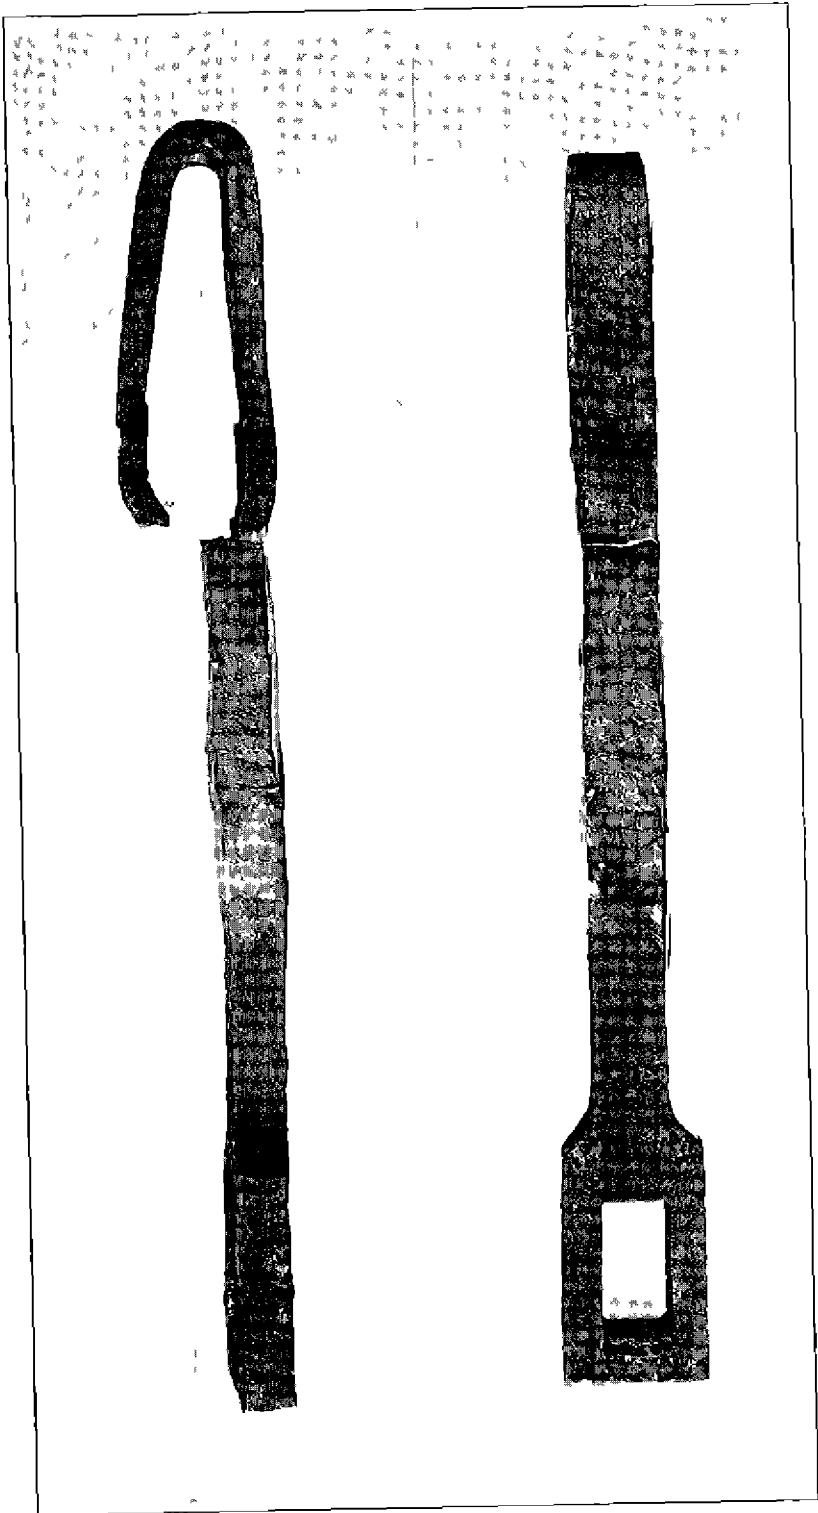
Two views of the fractured hanger. This hanger consisted of four pieces
